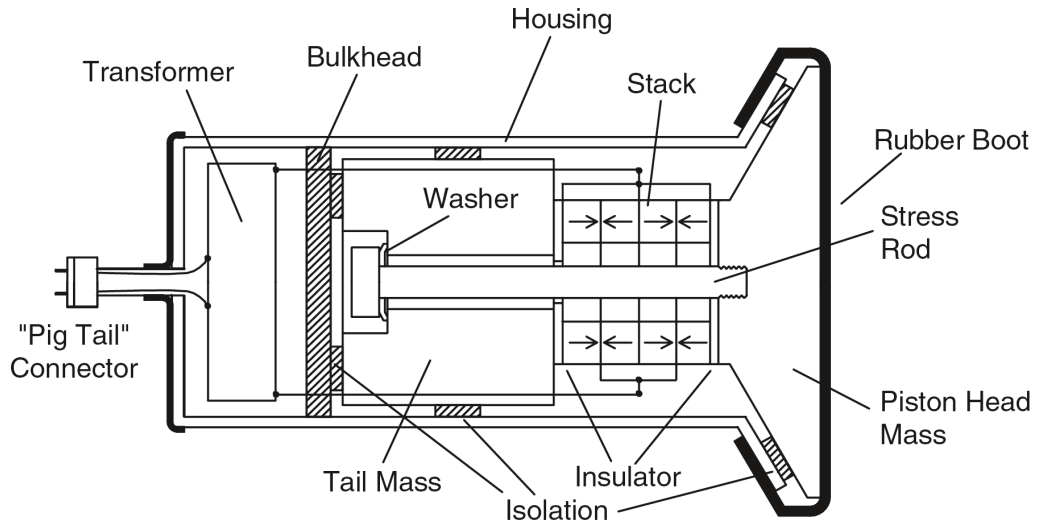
A detailed 2-D cross-sectional sketch of a typical Tonpiliz-type transducer [4]
